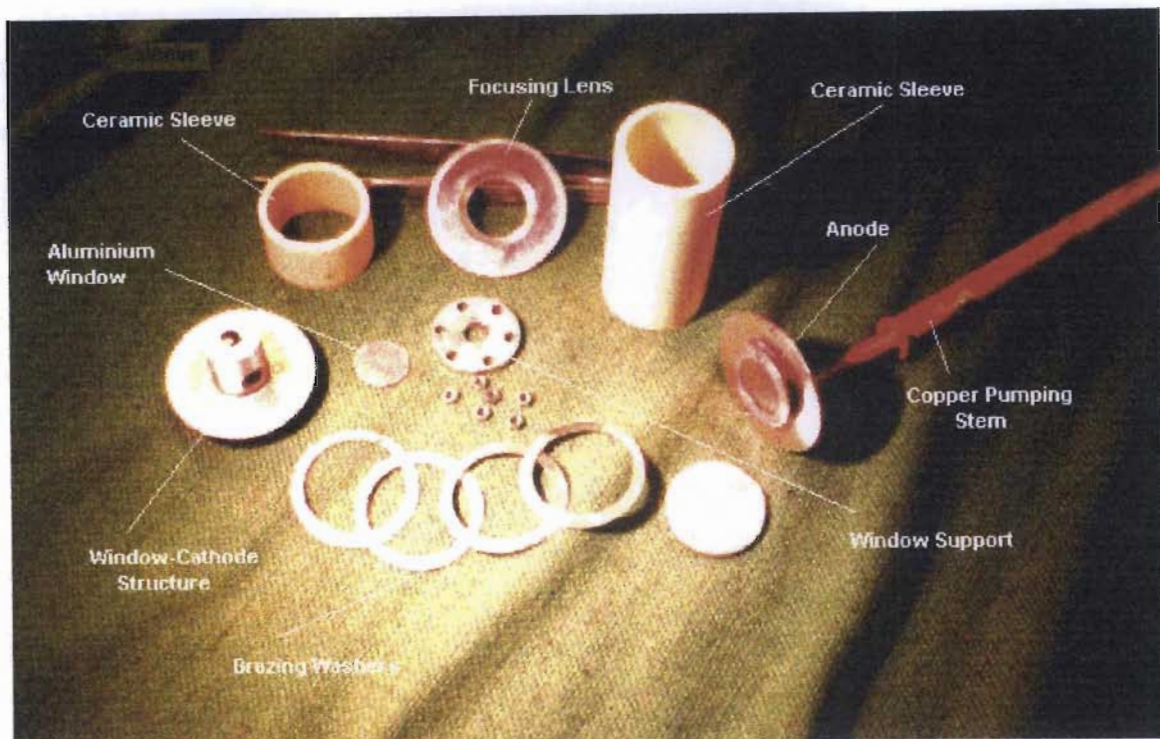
The components of the end-window cold cathode X-ray tube.
